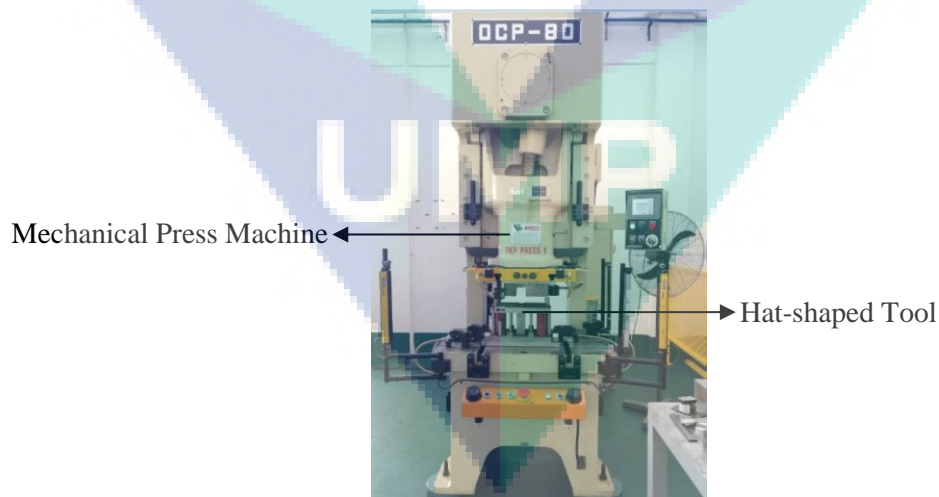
Fabrication of hat-shape sample by using mechanical press machine, OCP 80
